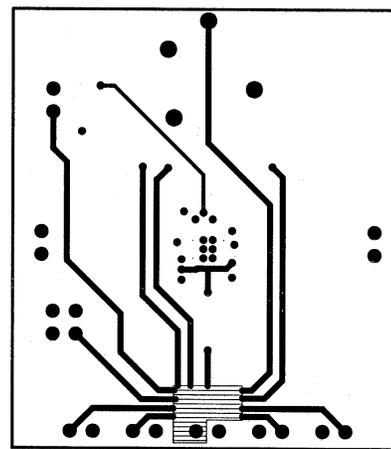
Recommended LQ PC Board Layout: Lower Inner-Layer Layout
